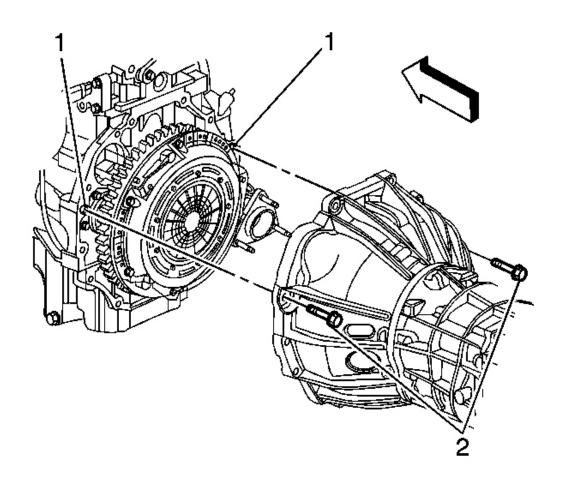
View Of Transmission Mounting Bolts & Engine Dowels Courtesy of GENERAL MOTORS CORP.
